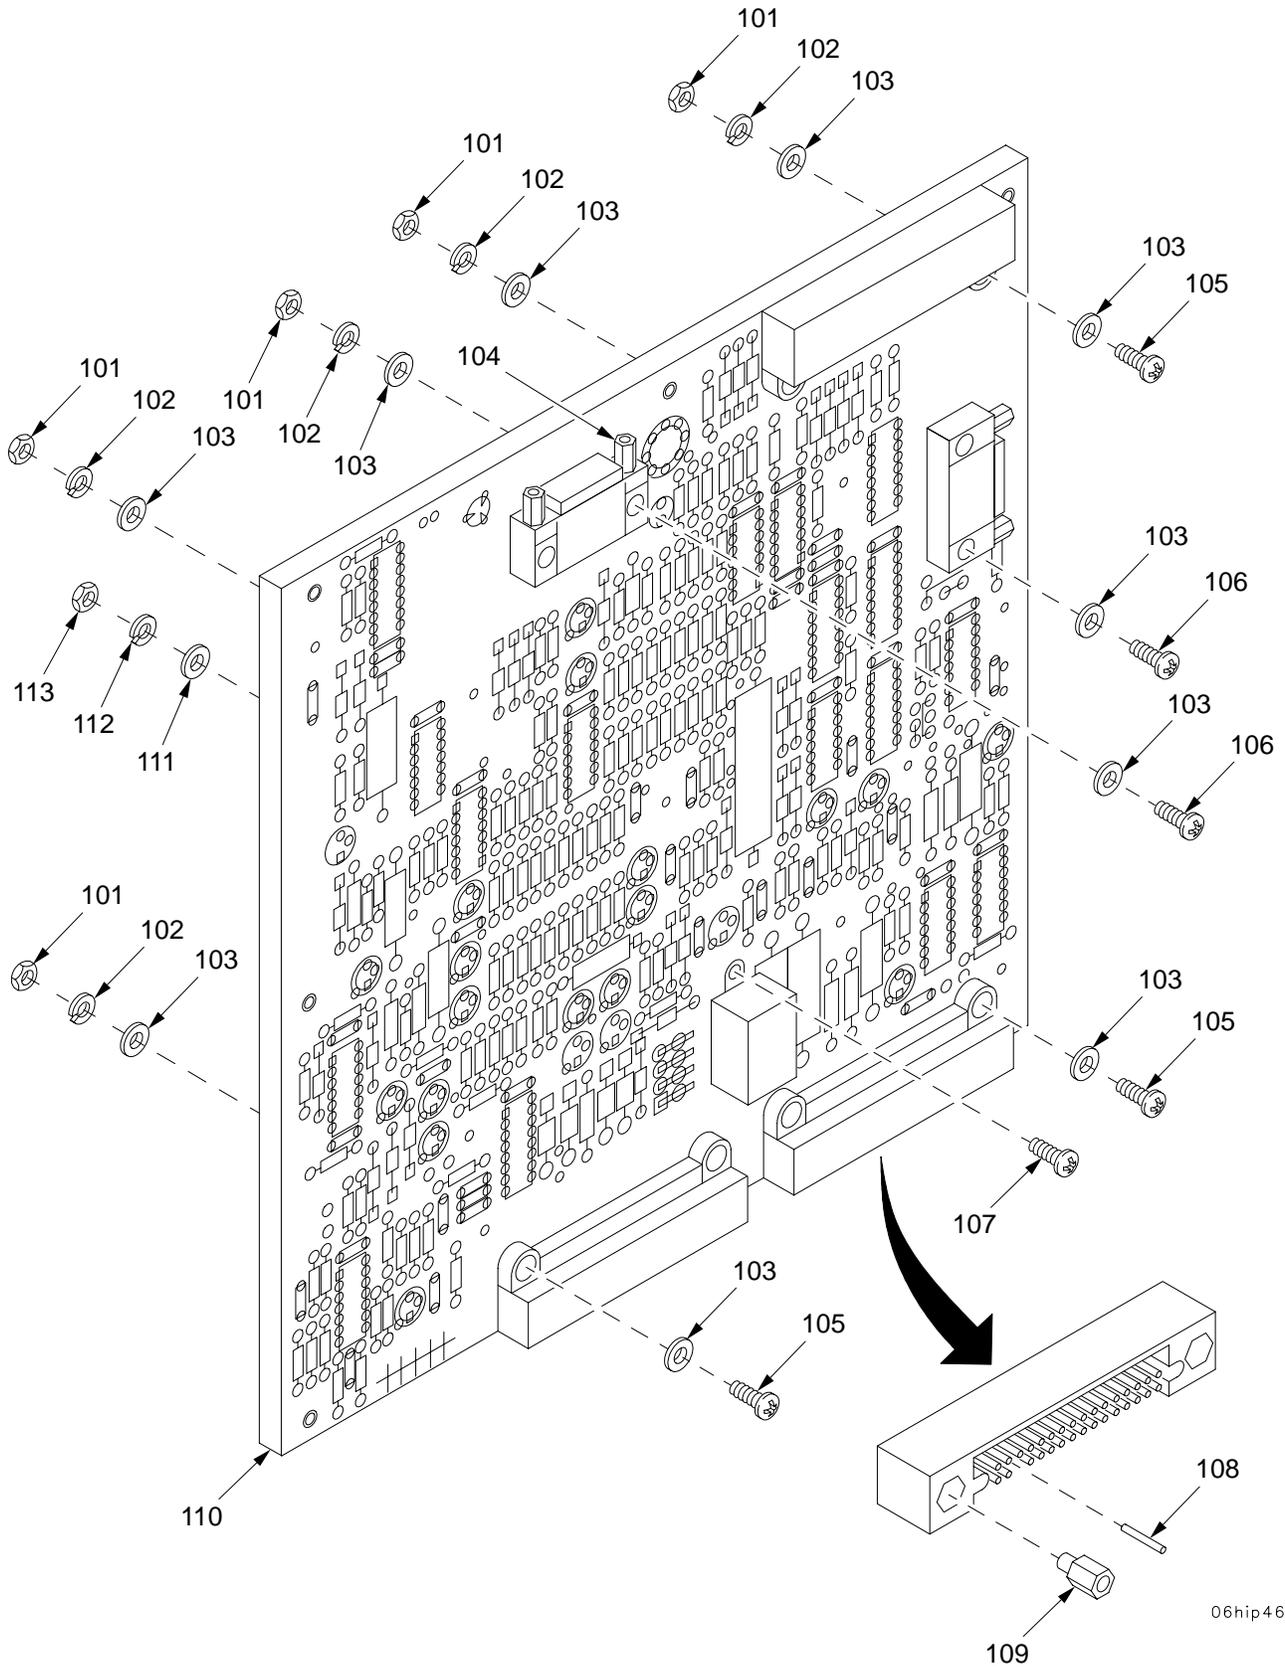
Circuit Card Assembly, PCU Main (12561695) (Sheet 1 of 3)
